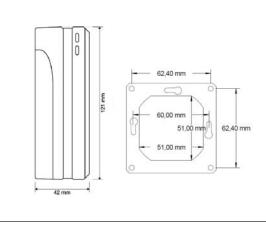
Dimensioned drawing to facilitate installation in wall box or panel front
